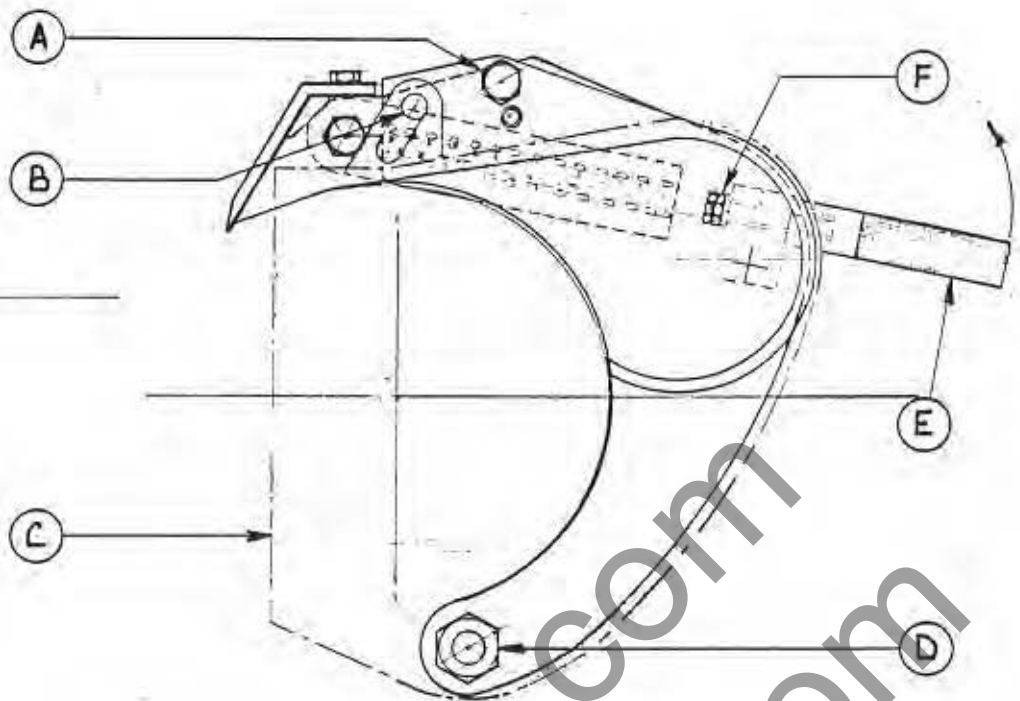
NEAR SIDE HEAD CHIPBREAKER
